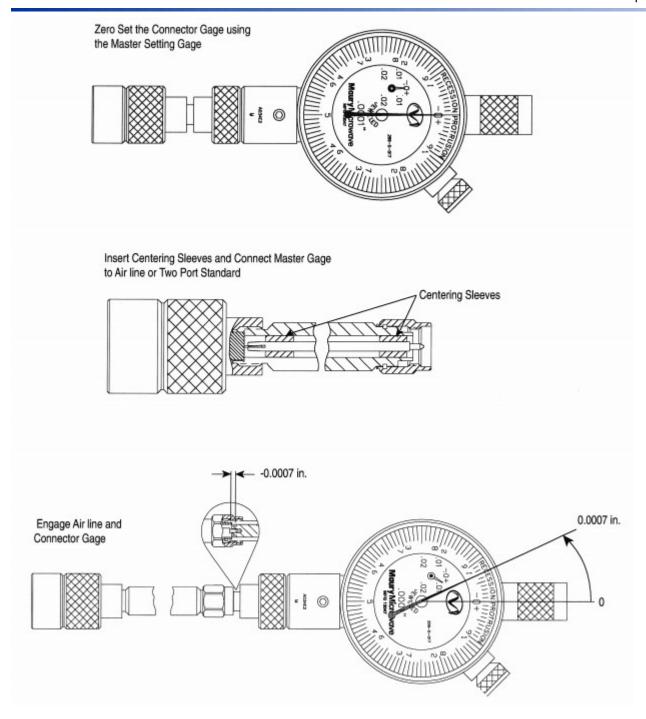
Gaging Beadless Precision 2.92mm and 3.5mm Airlines
